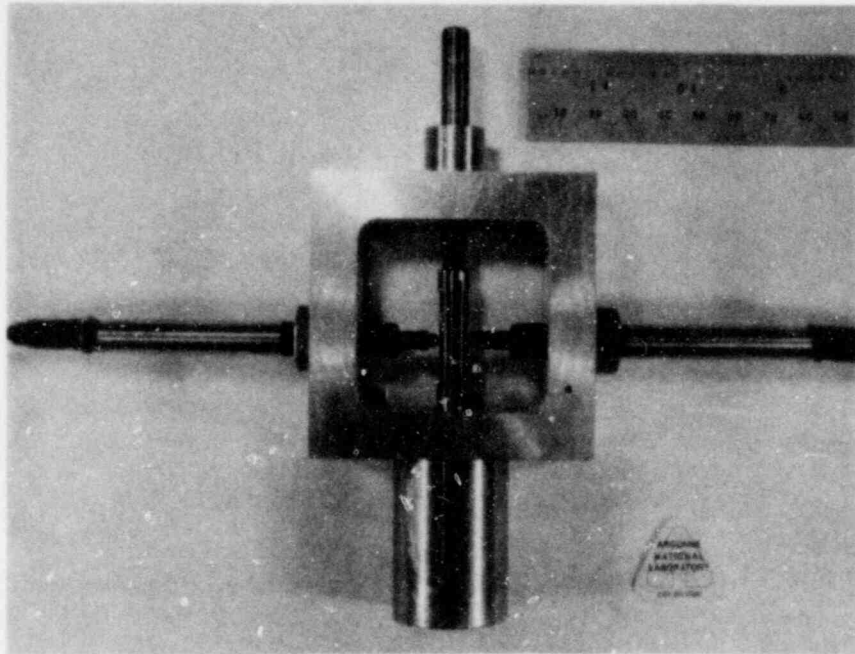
Instrumented Fixture Used in the Calibration of Expanding Mandrels.
